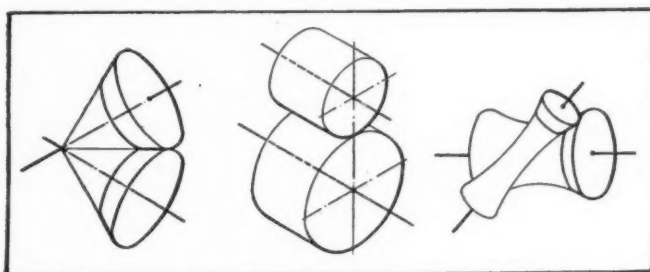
General types of gears include bevel gears, spur gears, and hypoid gears
